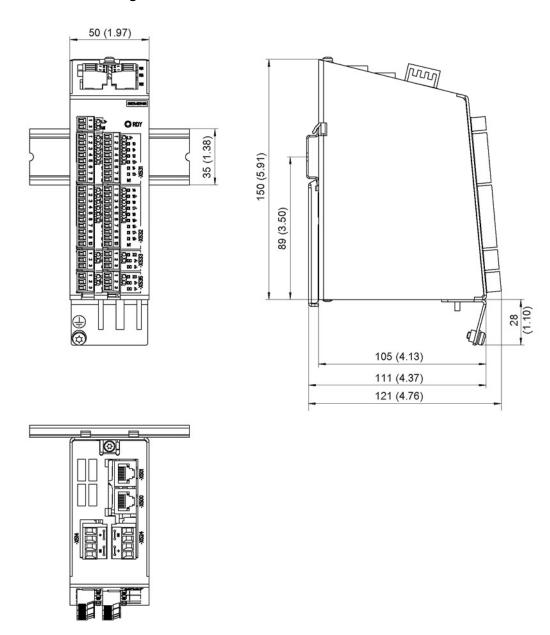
Dimension drawing of Terminal Module TM54F, all data in mm and (inches)
